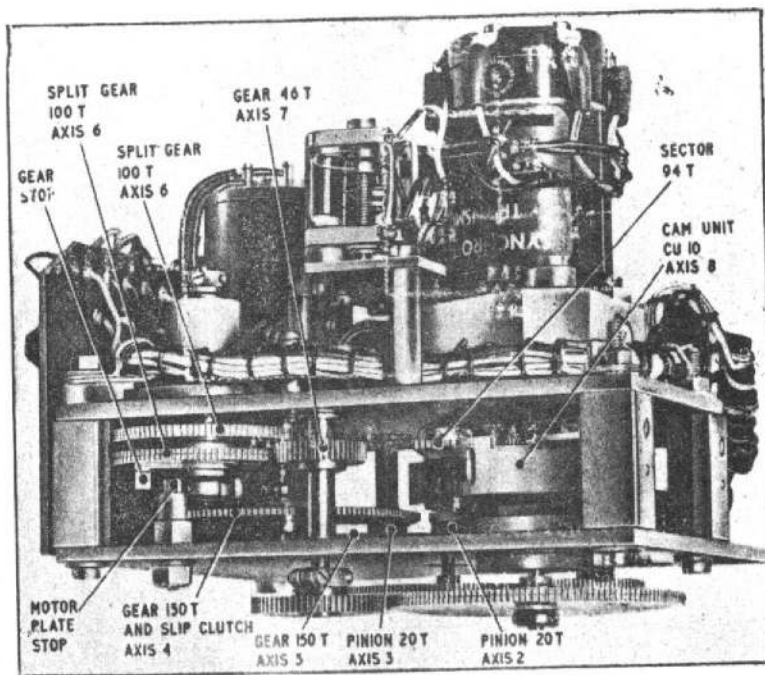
Vertical speed output gearbox assembly (G4)—view C
